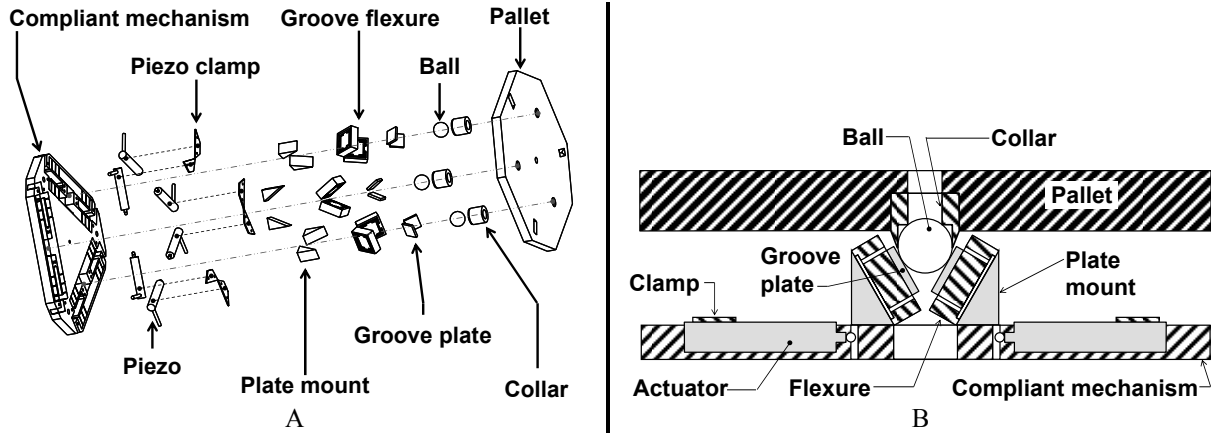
Exploded CNF prototype design (A) and cross-section of ball-groove joint (B)
